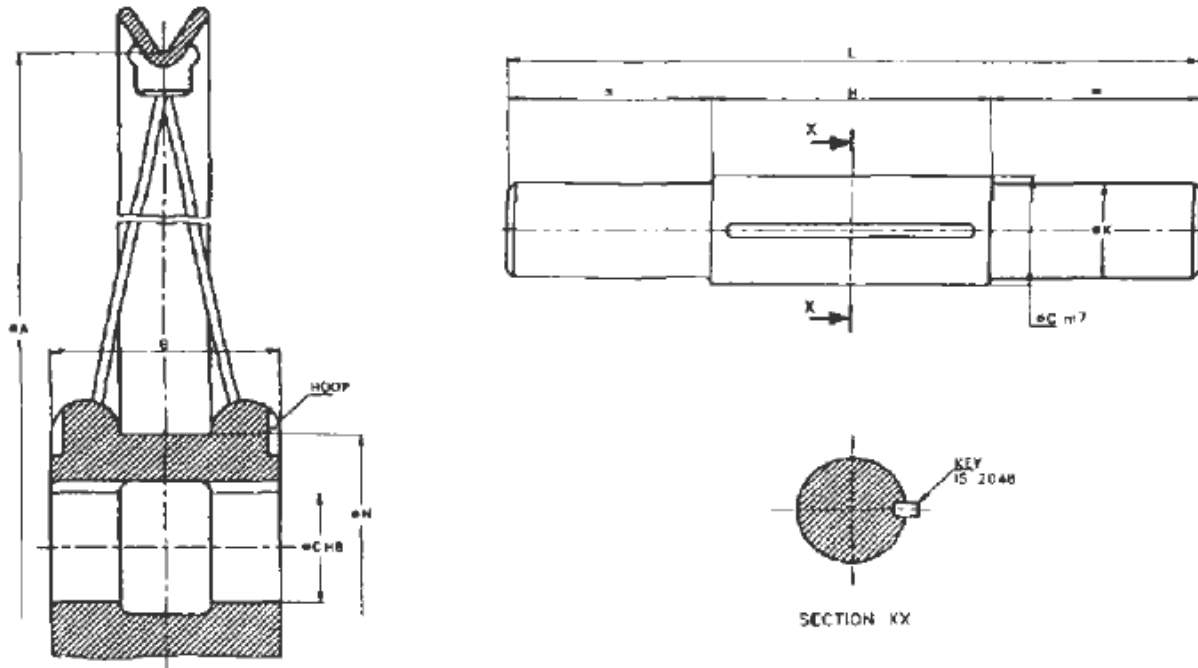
TYPICAL RIG FOR PROOF LOAD TESTING OF SHEAVES
